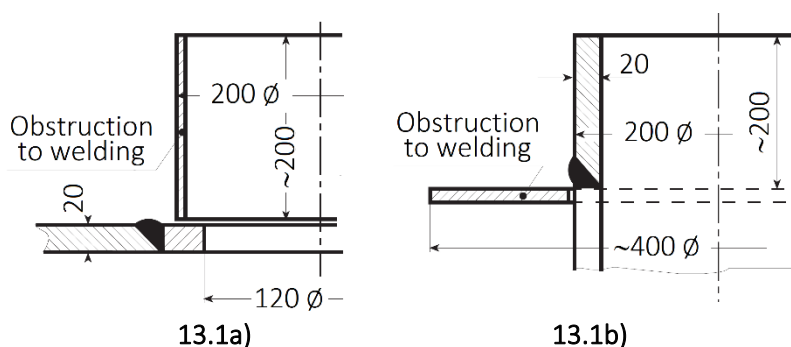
Test pieces for welding of sockets and nipples, inserted (left) and through-type (right)
